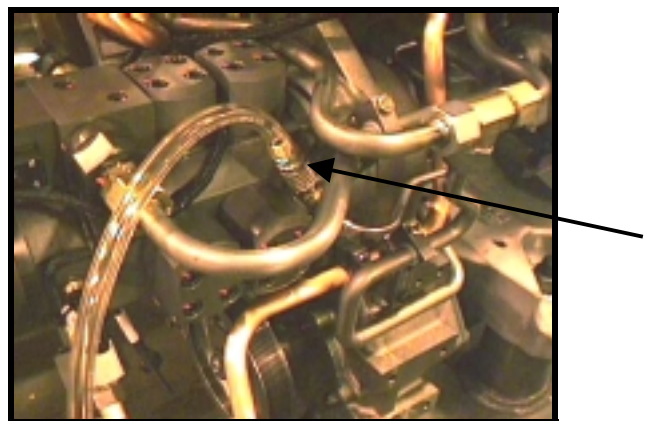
Vent Valve with Quick Coupling and Hose Connected
